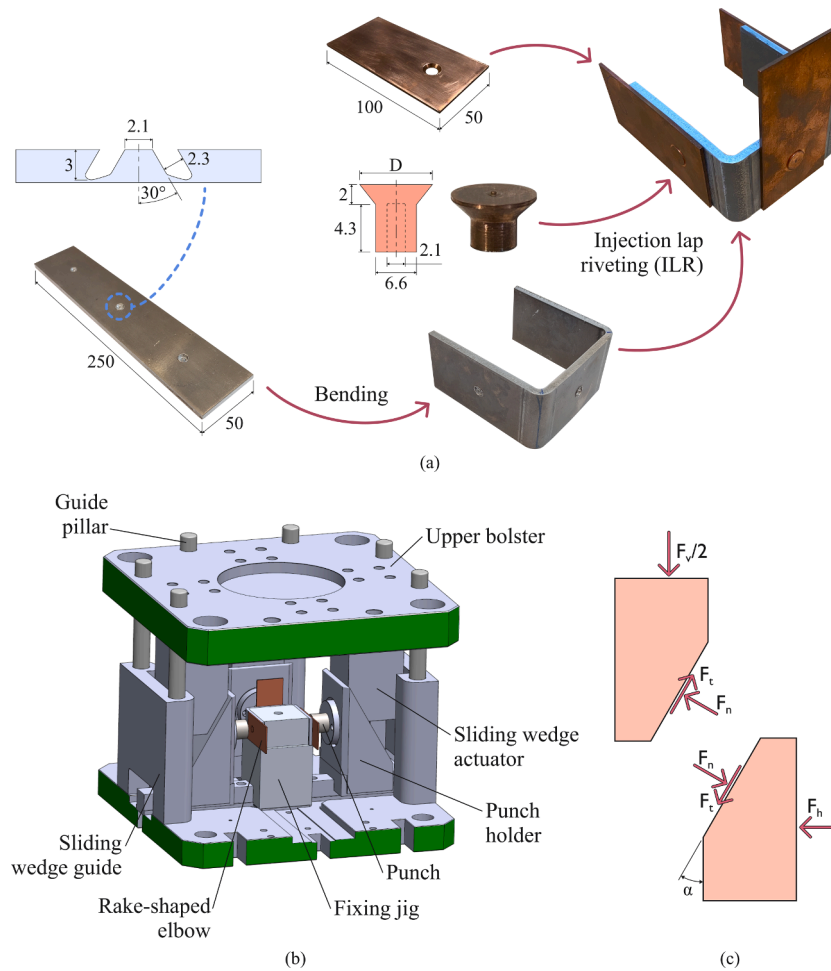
(a) Fabrication sequence of the rake-shaped elbows made from copper and aluminum sheets, (b) schematic representation of multiple injection lap riveting operations carried out simultaneously in a multidirectional tool and (c) detail of the free-body diagram of the cam slide units.
